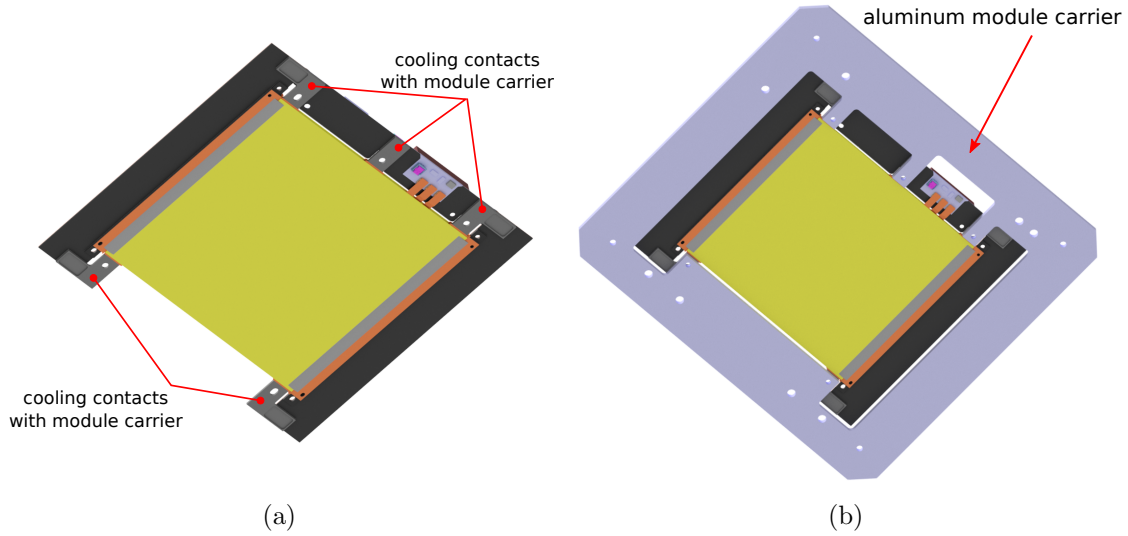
A 2S module seen from below before (a) and after (b) the mounting on an aluminum module carrier. The carriers are used in the module production centers to handle the assembled modules. The module can be cooled via the carrier at the five mounting points where the module is screwed on the carrier.
